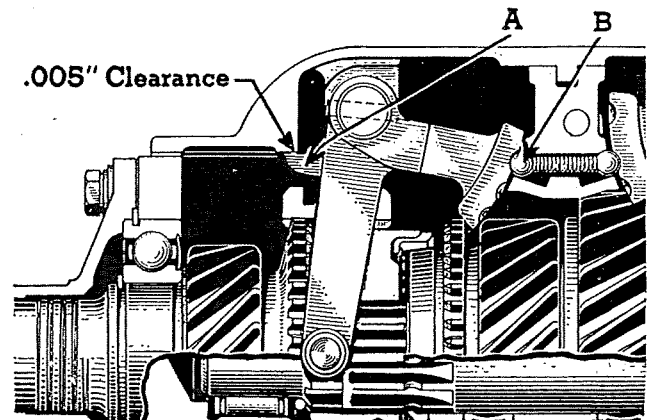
Group No. 27 1939. Showing clearance between face of fork stop lug "A" and stop on cover in high gear position indicated by "B"
